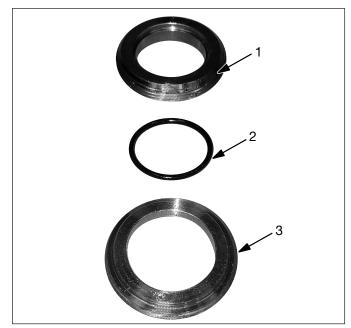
, Stop Ring, Guide Ring, and O-ring (View 2 of 2)
